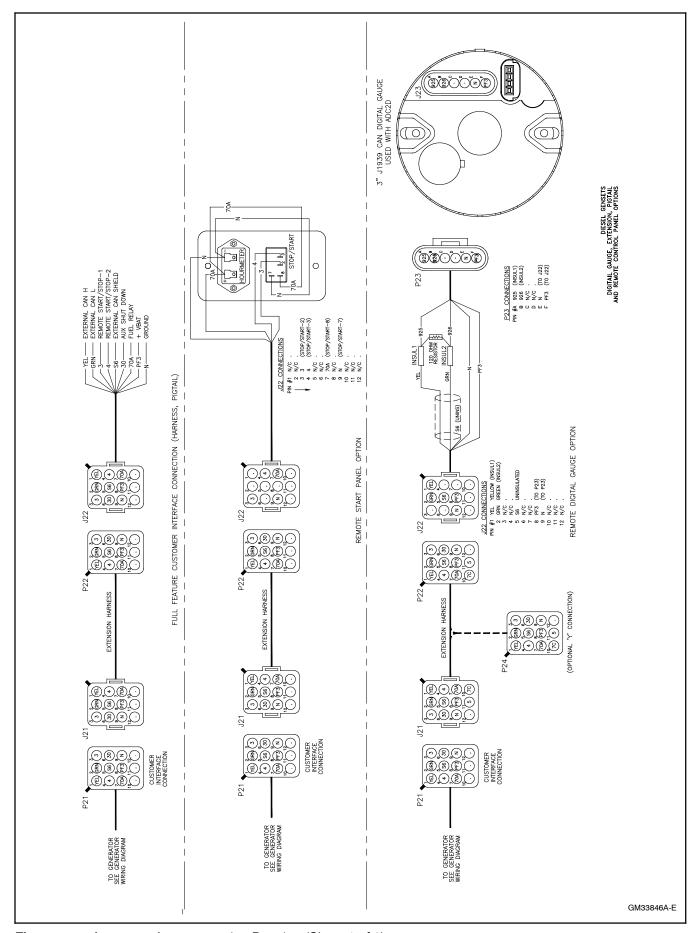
Accessory Interconnection Drawing (Sheet 1 of 2)
